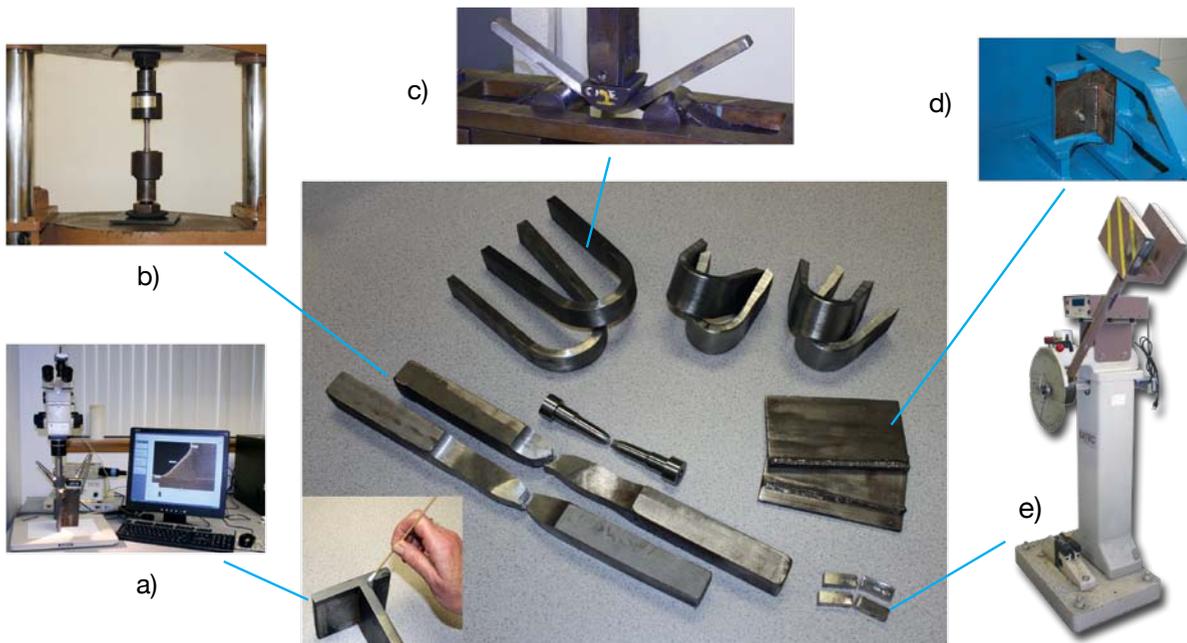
Destructive Testing Methods – a) Etched Cross-Section, b) Tensile Strength, c) Guided Bend, d) Fillet Weld Break, and e) Impact Testing
